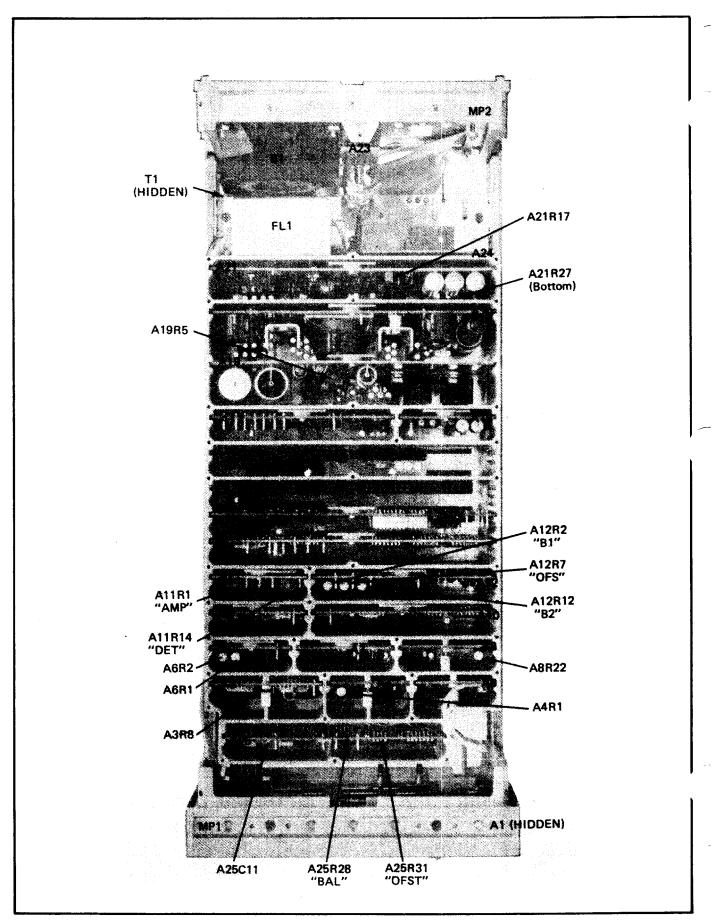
5342A Top View (Assembly Locations and Adjustments)
